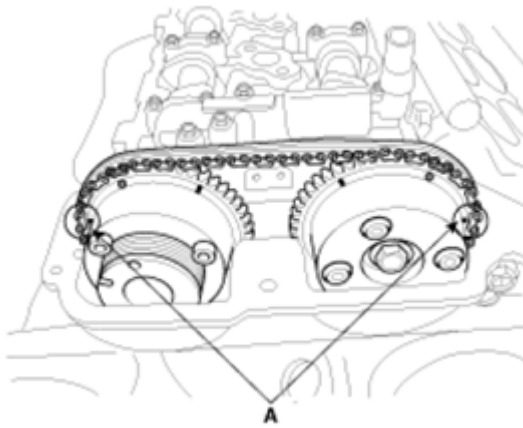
Identifying Timing Mark On Camshaft Timing Sprocket
